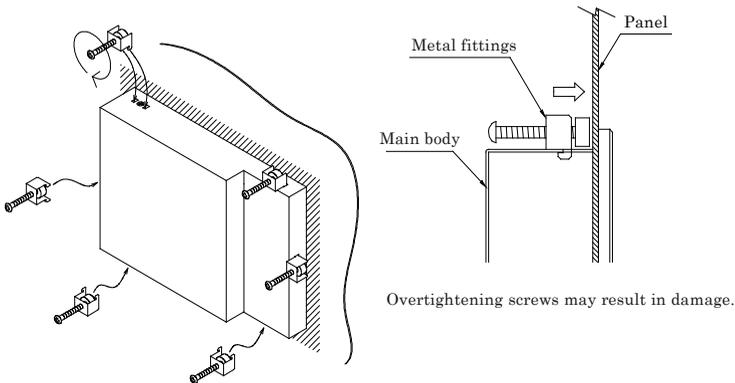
Attaching the attachment fittings to the Main Unit < 2 / 2 >
